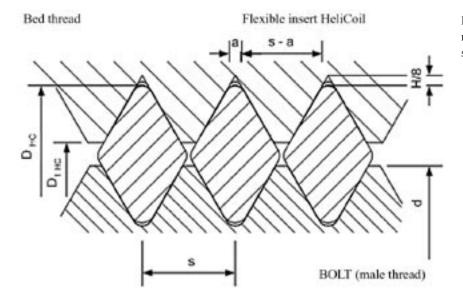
Metric thread of the basic rank created by flexible thread insert HeliCoil
